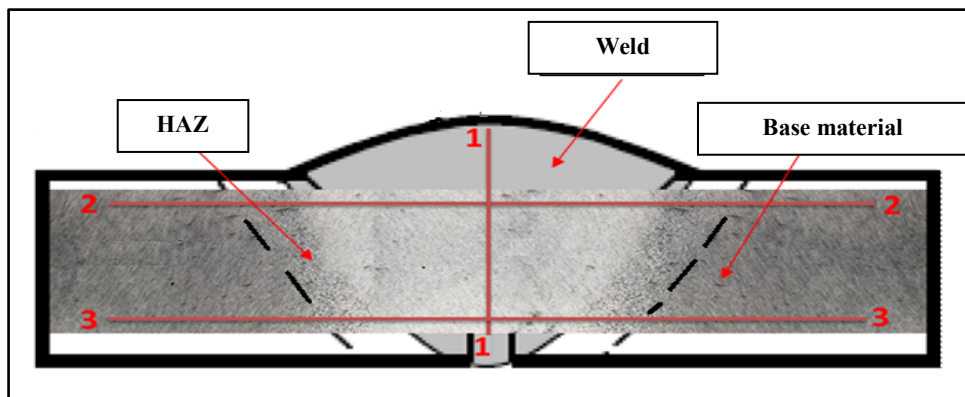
Microhardness measurement paths of welded joints, HAZ – heat affected zone
